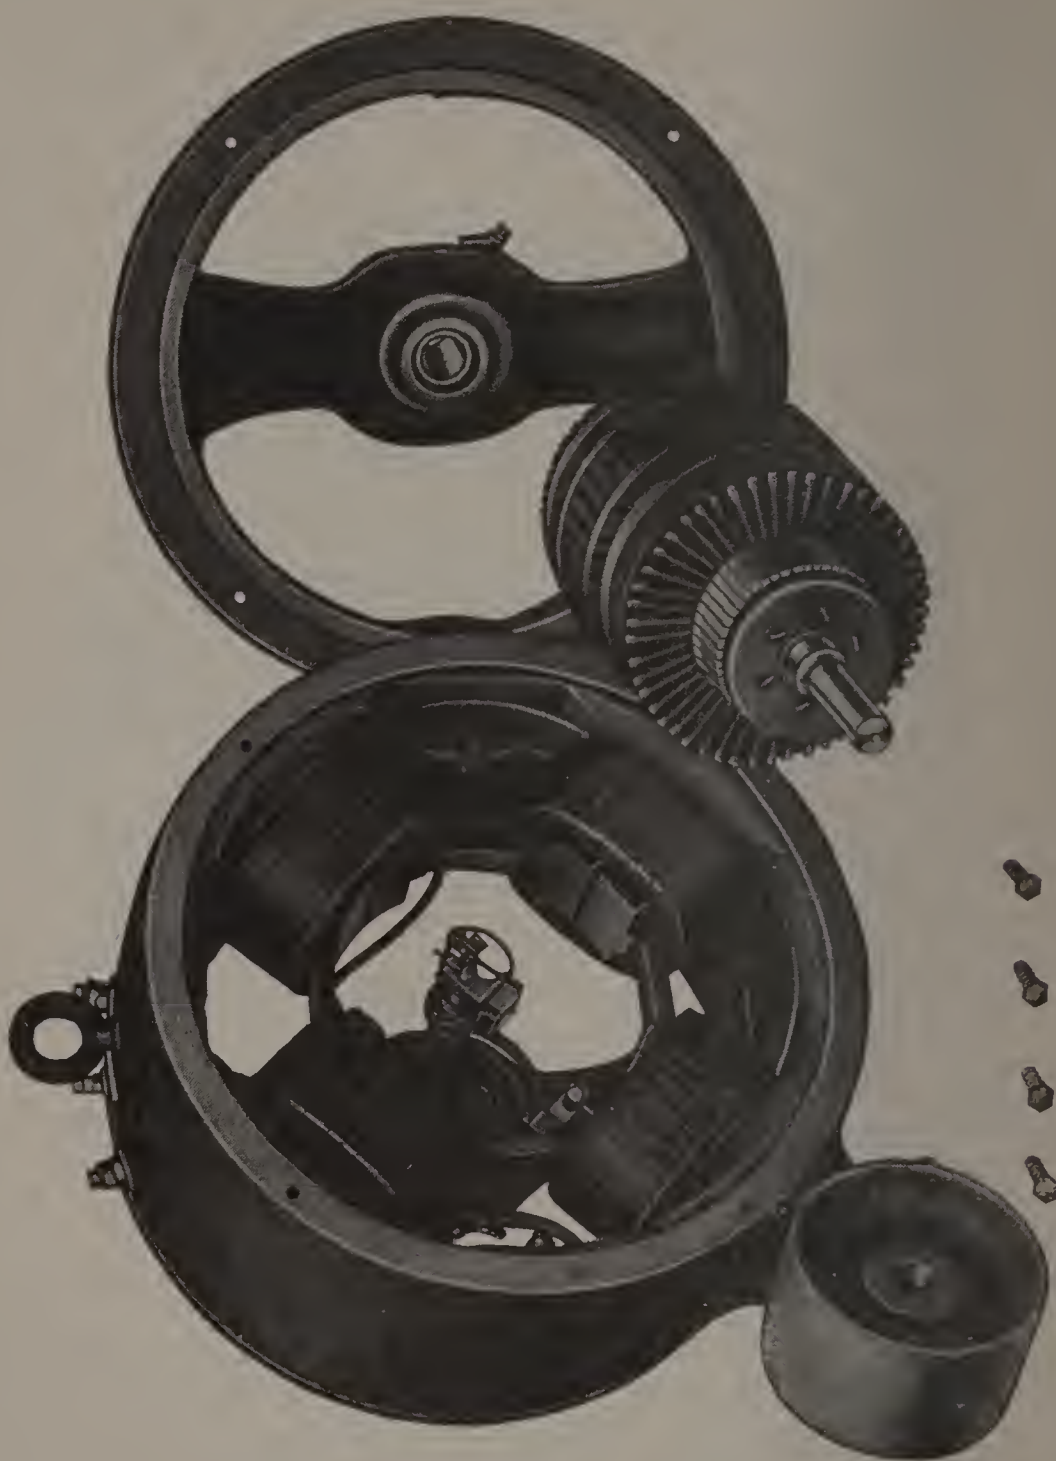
FORT WAYNE FOUR-POLE DYNAMO, SHOWING PARTS NOT ASSEMBLED.
